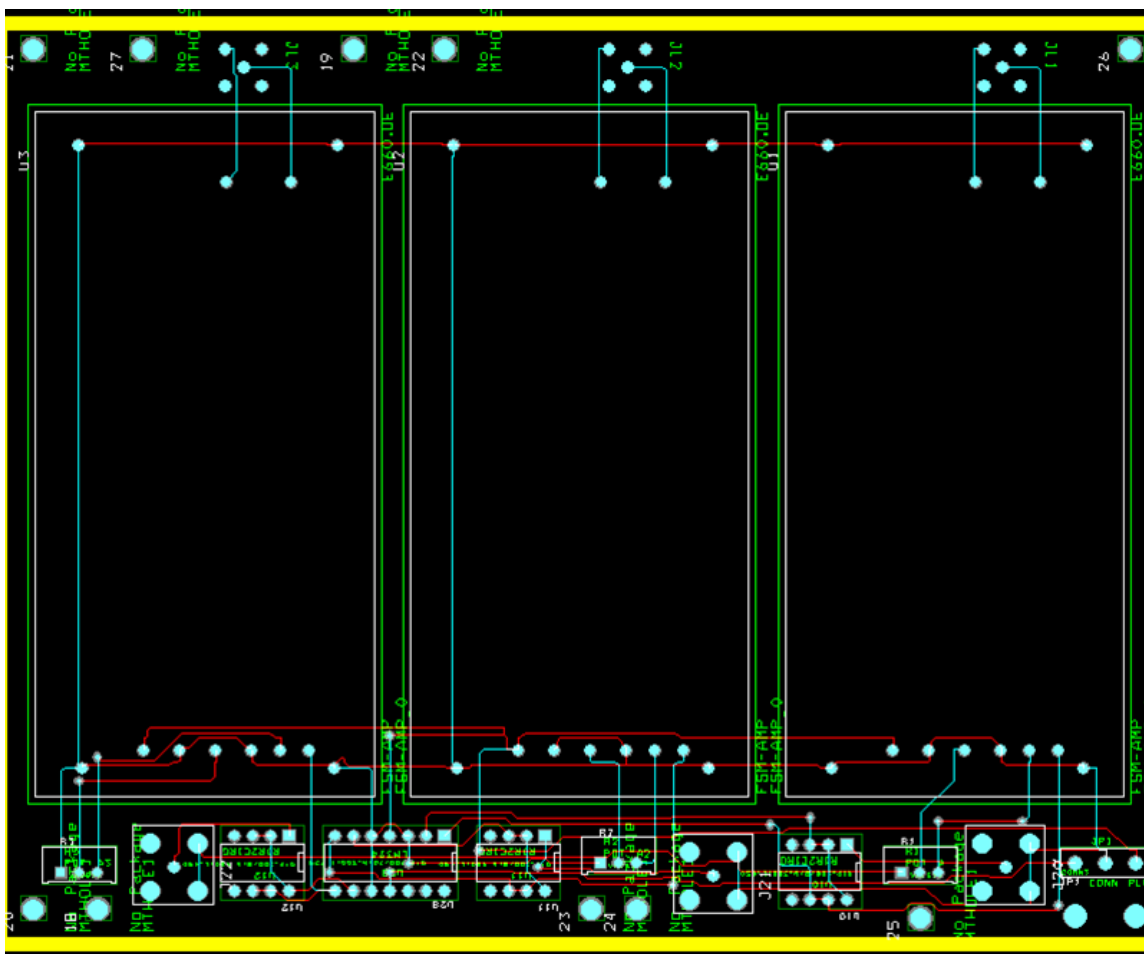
Printed circuit board design using Orcad Layout. Three coaxial inputs on the bottom and three LEMO outputs on the top.
